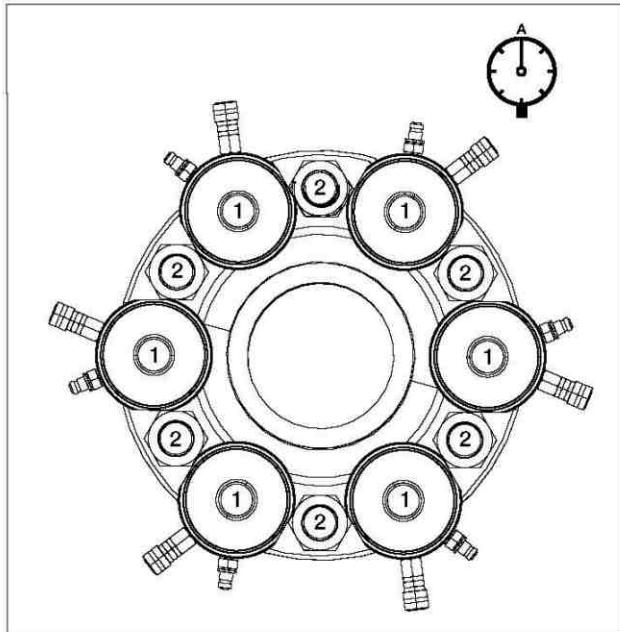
Tensioner Arrangement, First Pass-Typical
